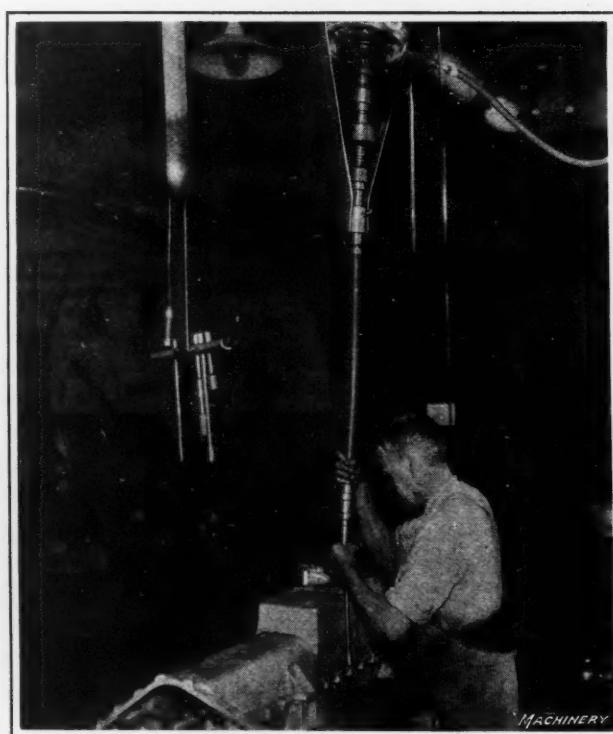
Nut-driving Machine of Overhead Type with Flexible Shaft Drive
